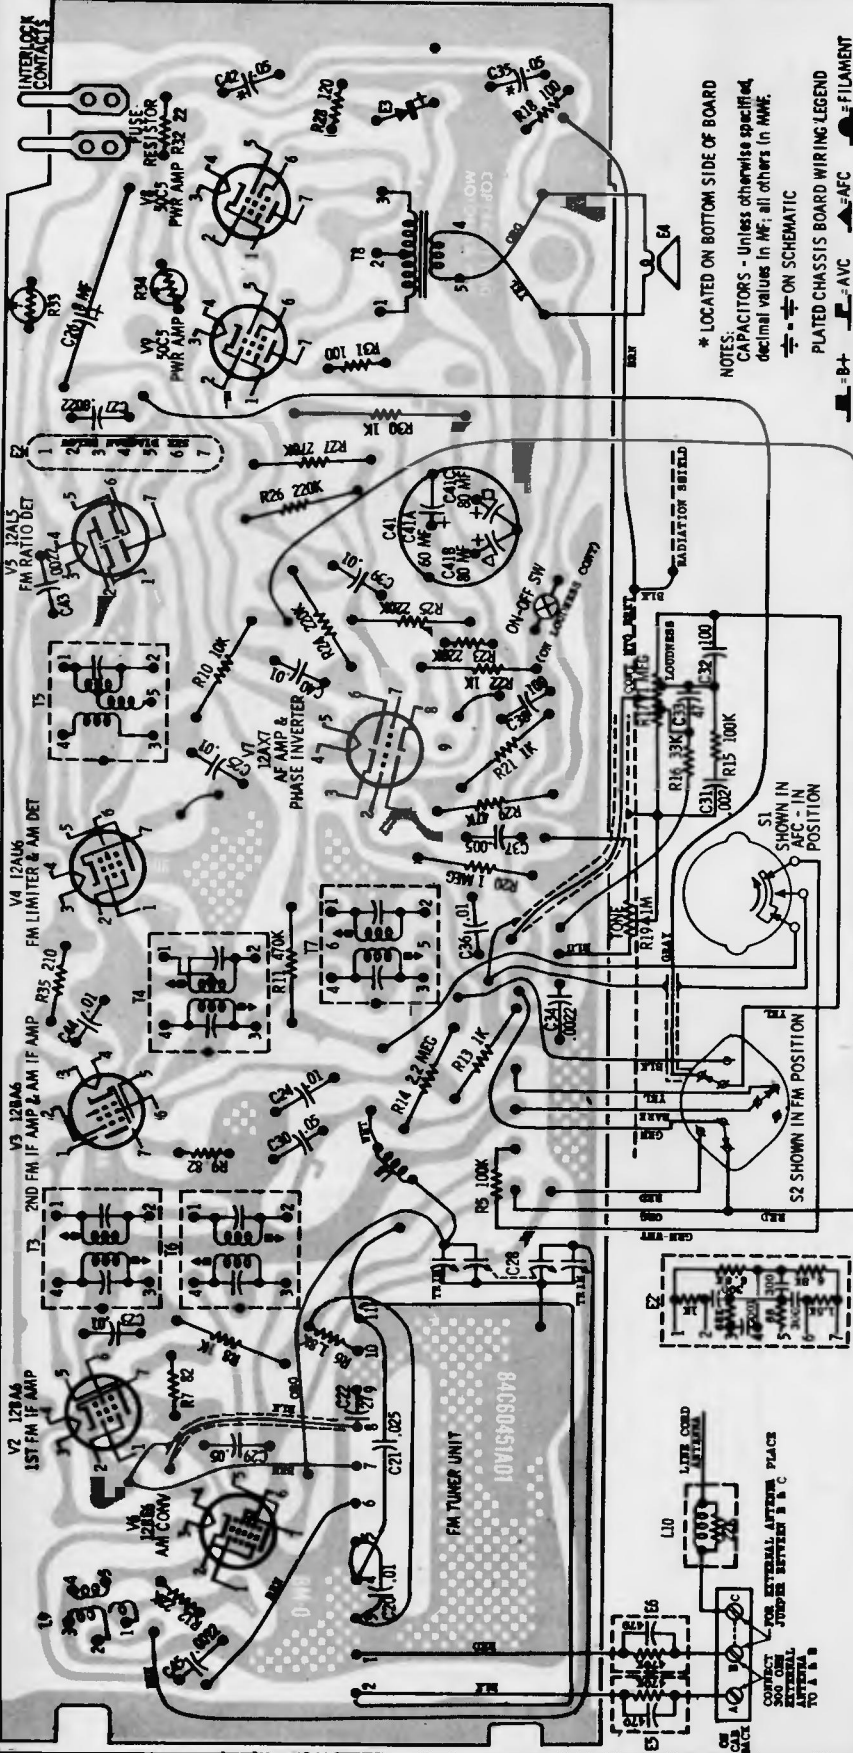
PLATED CHASSIS BOARD WIRING AS VIEWED FROM BOTTOM (COMPONENTS SHOWN ARE LOCATED ON OPPOSITE SIDE)
